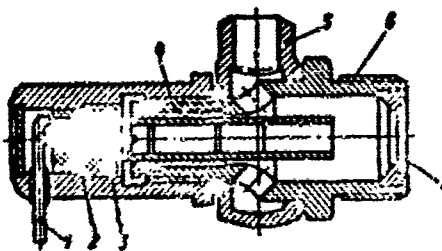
Forced burst diaphragm with explosive charge. 1) electric current to explosive charge; 2) explosive charge barometer; 3) ignition contacts; 4) diaphragm; 5) intake pipe; 6) exhaust pipe; 7) forced-burst diaphragm.
